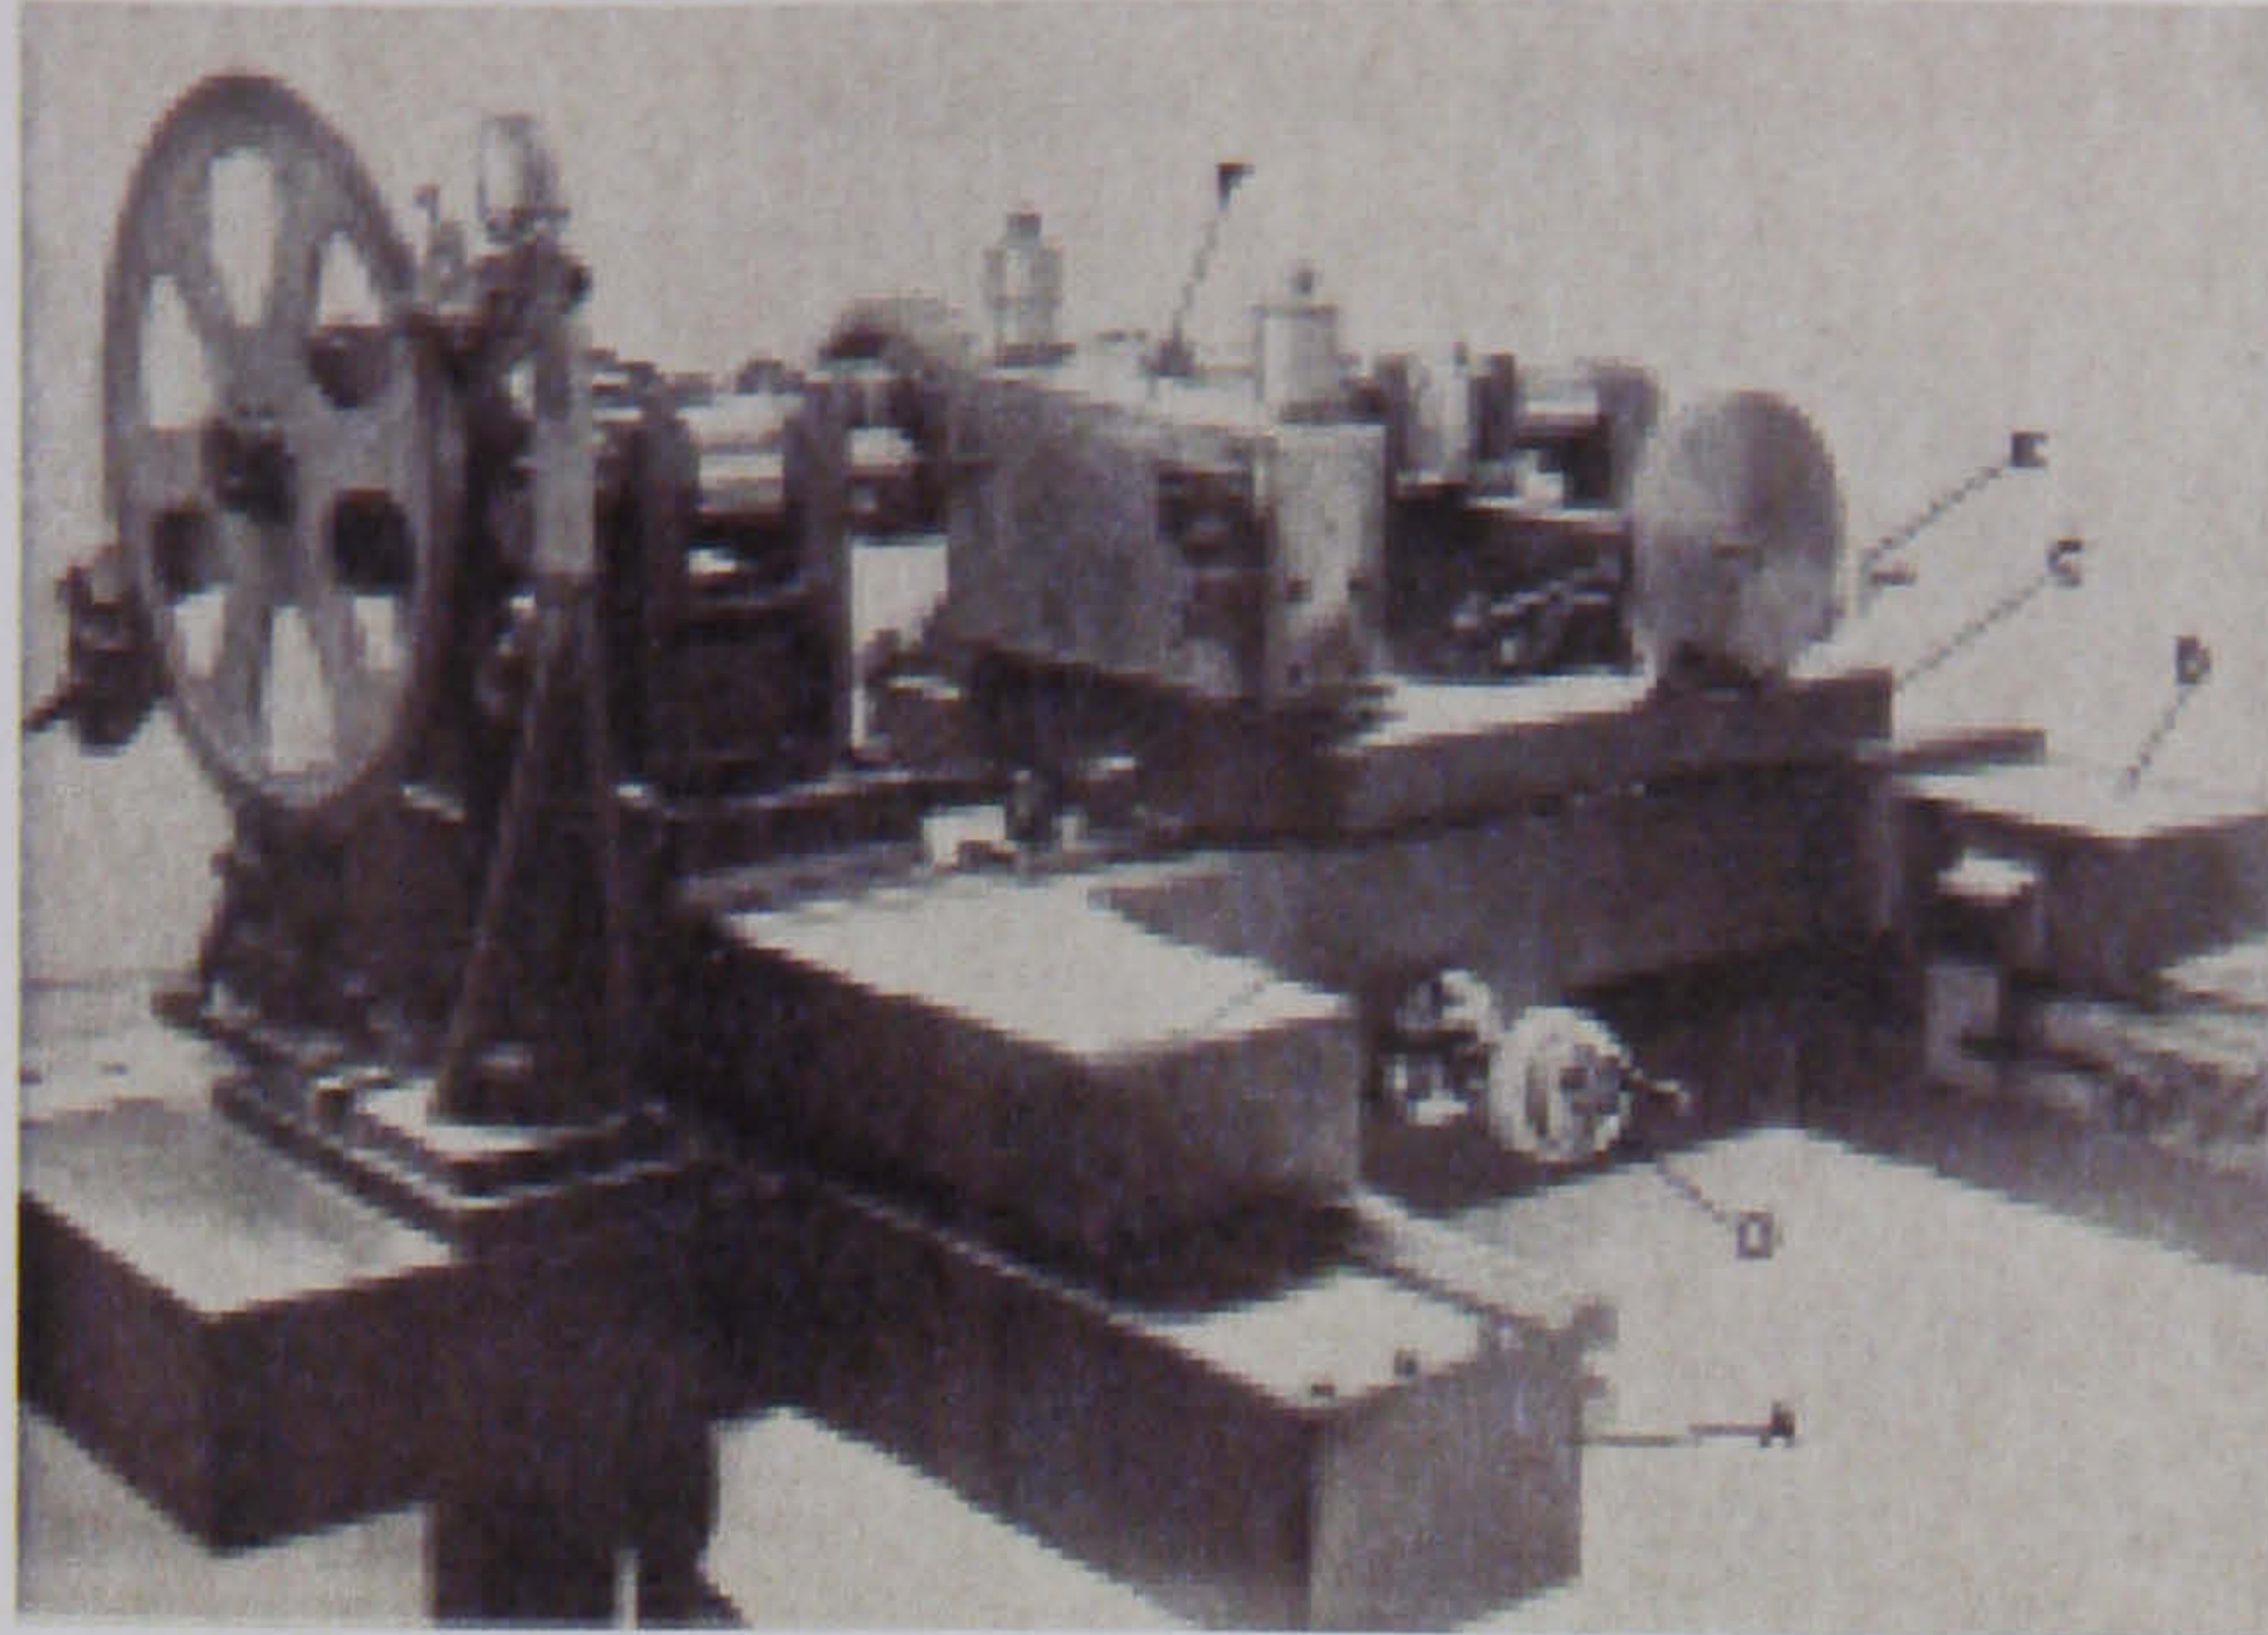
Tomlinson gear measuring machine (circa 1923) [Rolt].
